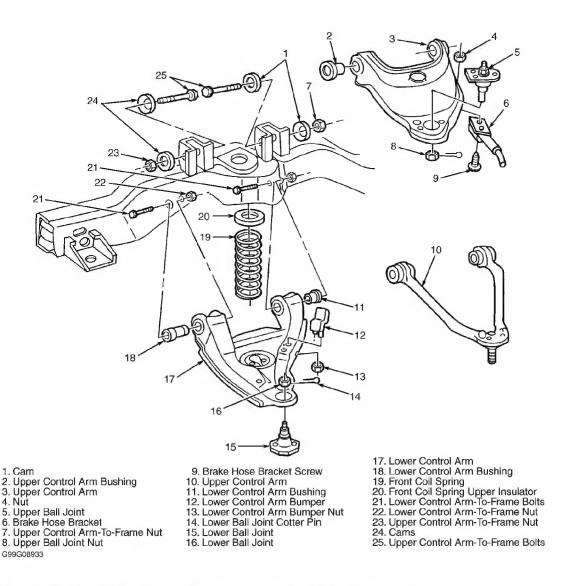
Exploded View Of Front Suspension (Typical) Courtesy of GENERAL MOTORS CORP.
